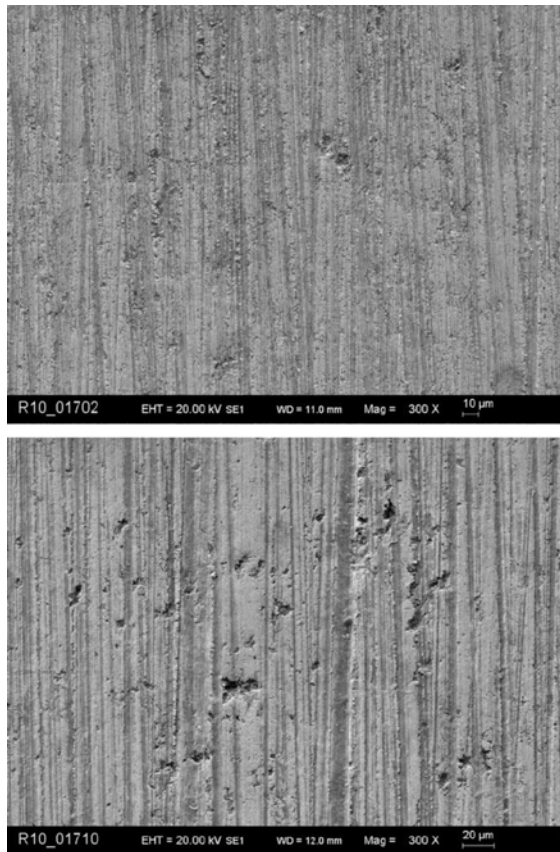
Different surfaces after processing of a WC/Co coating and a WC/CoCr coating (bottom)<sup>9</sup>
